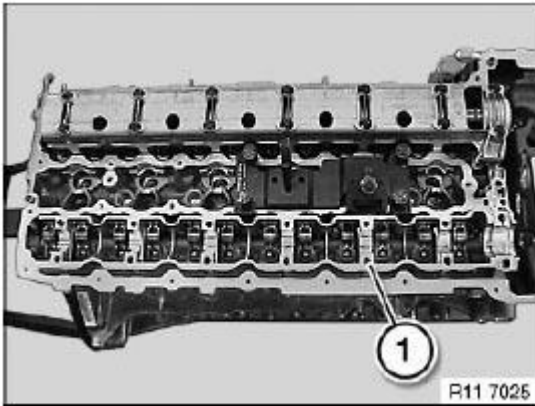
Identifying Lower Bearing Strip On Cylinder Head
